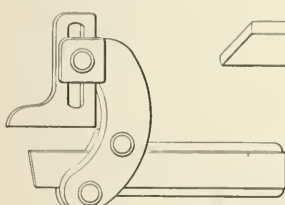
Slate Cutting-off Tool-holder provided with Steadyrest.
